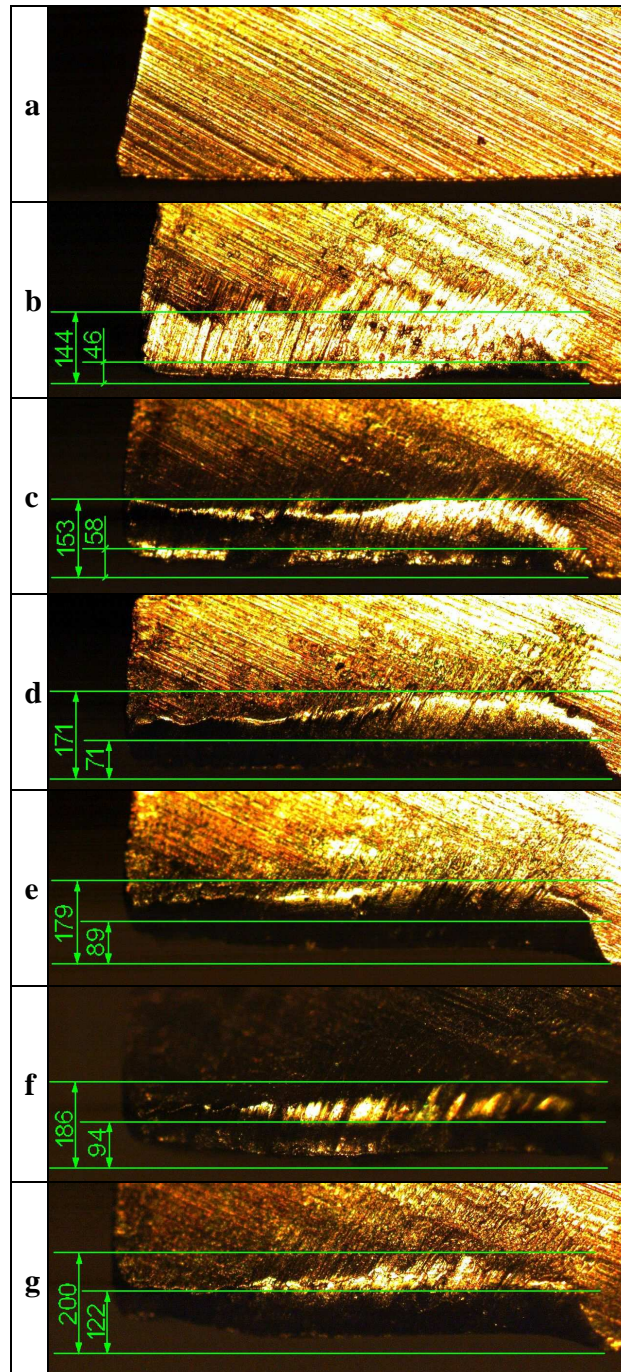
MTE 9mm end mill tooth # 1 trochoidal toolpath rake face wear a) Fresh tool, b-g) After pass 1-6 (each 54 mm length, 27 mm width, 1 mm depth).
